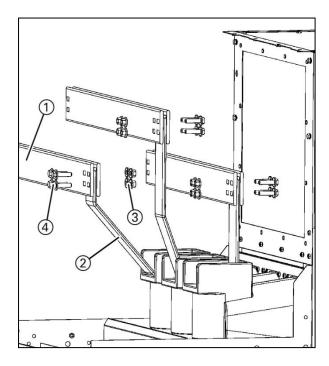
Assembly of 2500 A busbar, feeder ≤ 1250 A, Ur = 24 kV, bolted joints at the end panel
